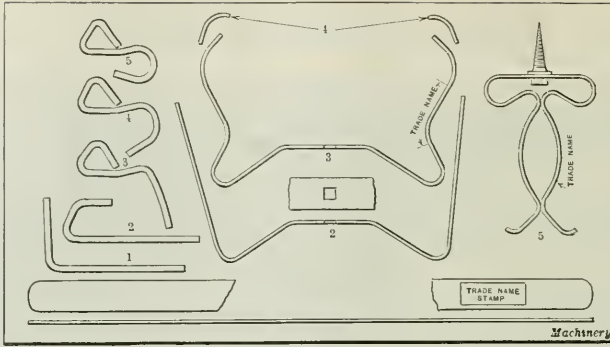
Successive Shapes in the Manufacture of an S-hook and of a Holder made from Ribbon Stock
